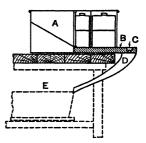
Cross section of bins showing chute for drop delivery: A, bins with sloping bottom; B, top of fixture; C, countersunk holes in top of fixture; D, chute; E, container for finished assemblies.
